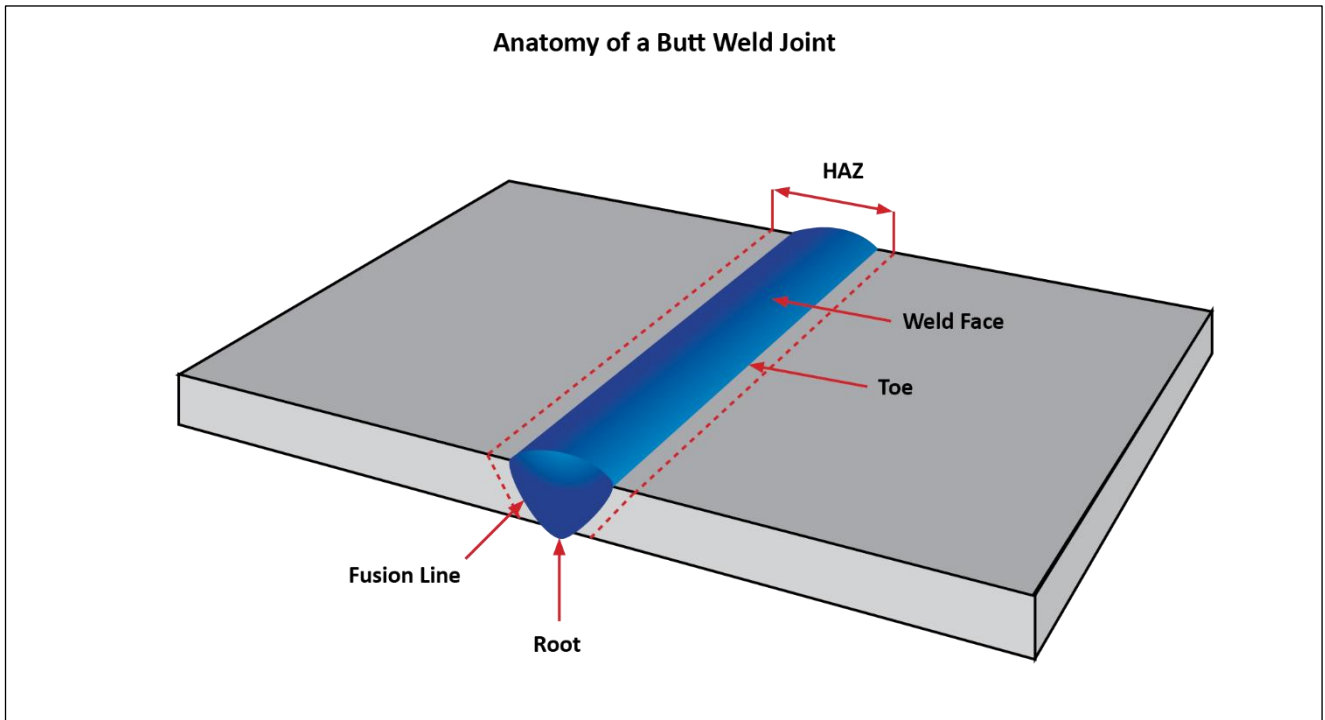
Terms used to describe the characteristics of a butt weld joint.
